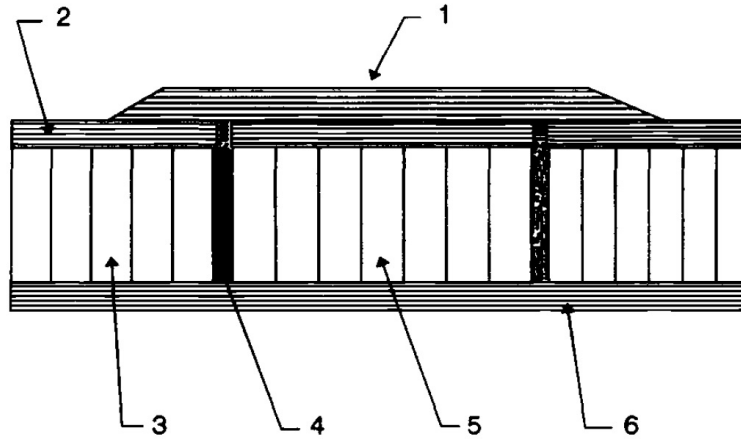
Bonded repair on sandwich structure (1: external patch; 2: skin; 3: core; 4: adhesive; 5: core insert; 6: lower skin) [18].
